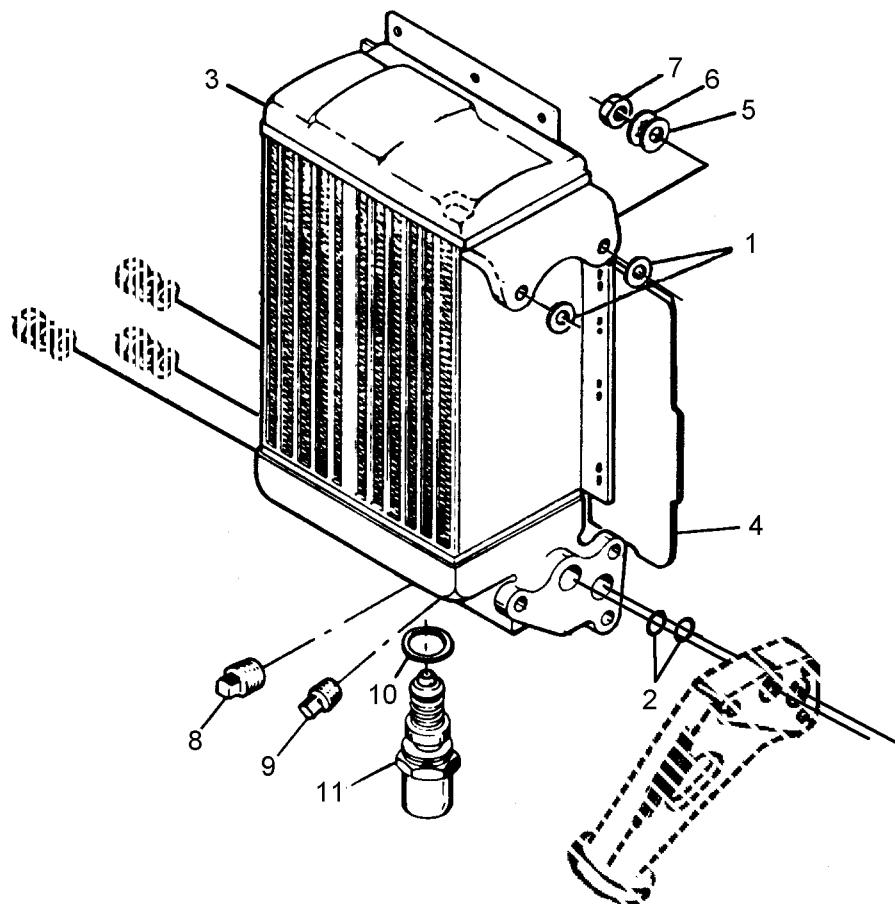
A. OIL COOLER ASSEMBLY FOR I0-550-A,
